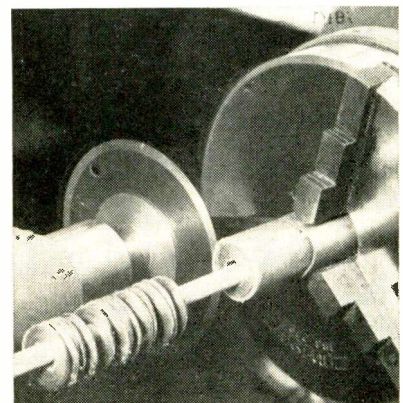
Concept of complete mechanized setup for producing transformers using wafer coils
